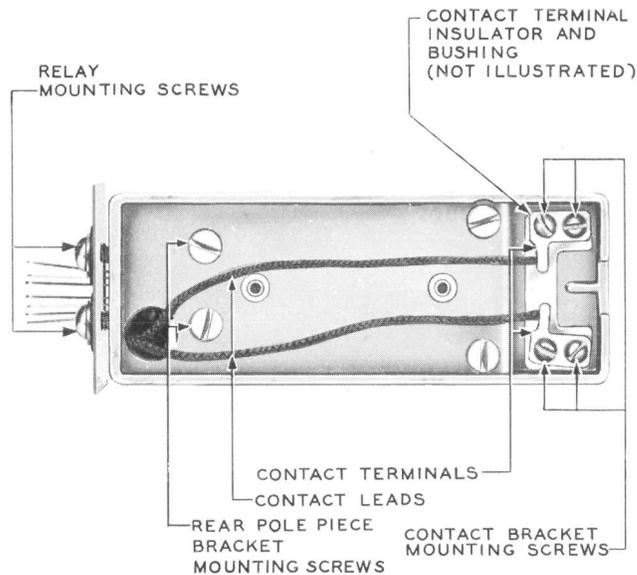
280-Type Relay - Bottom View With Shell and Cover Cap Removed
